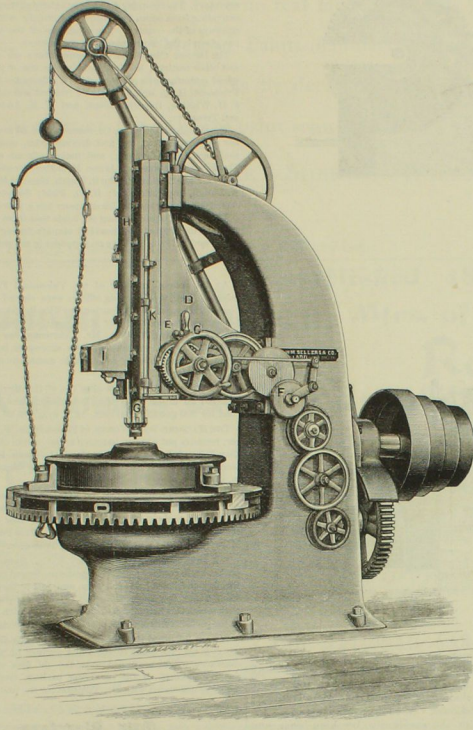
Wm. Sellers & Co.'s New Car Wheel Boring Mill.
